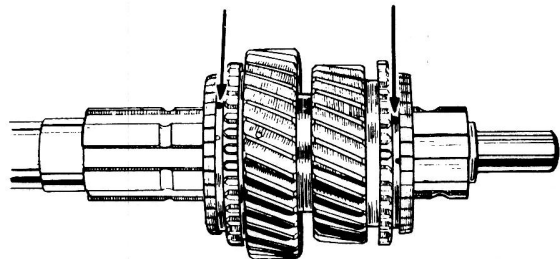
Showing the holes through which the thrust washer locking plungers are depressed
